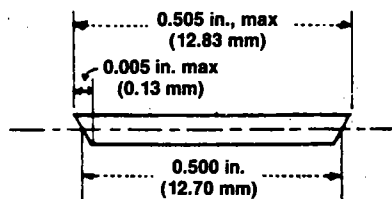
Tension Test Specimens for Sheet, Plate, and Molded Plastics
